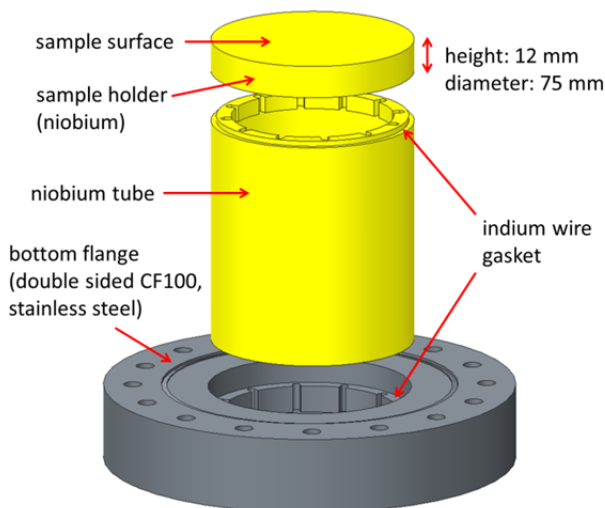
Exploded view of the alternative calorimetry chamber. The sample holder is a disk of 12 mm height and 75 mm diameter with the sample surface on top and threads for assembly and sensor mounting on its bottom. Indium wire gaskets are used in order to achieve RF and vacuum tight connections of all parts [4].
